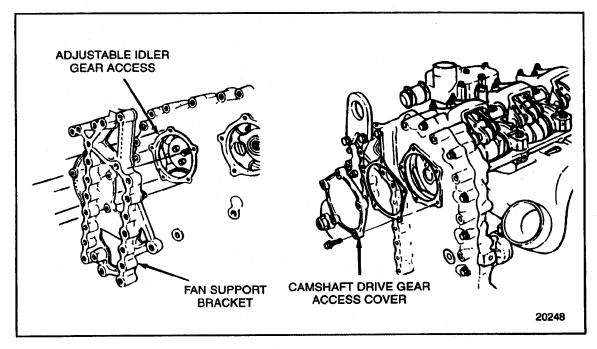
Camshaft Drive Gear Access Cover and Adjustable Idler Gear Access
